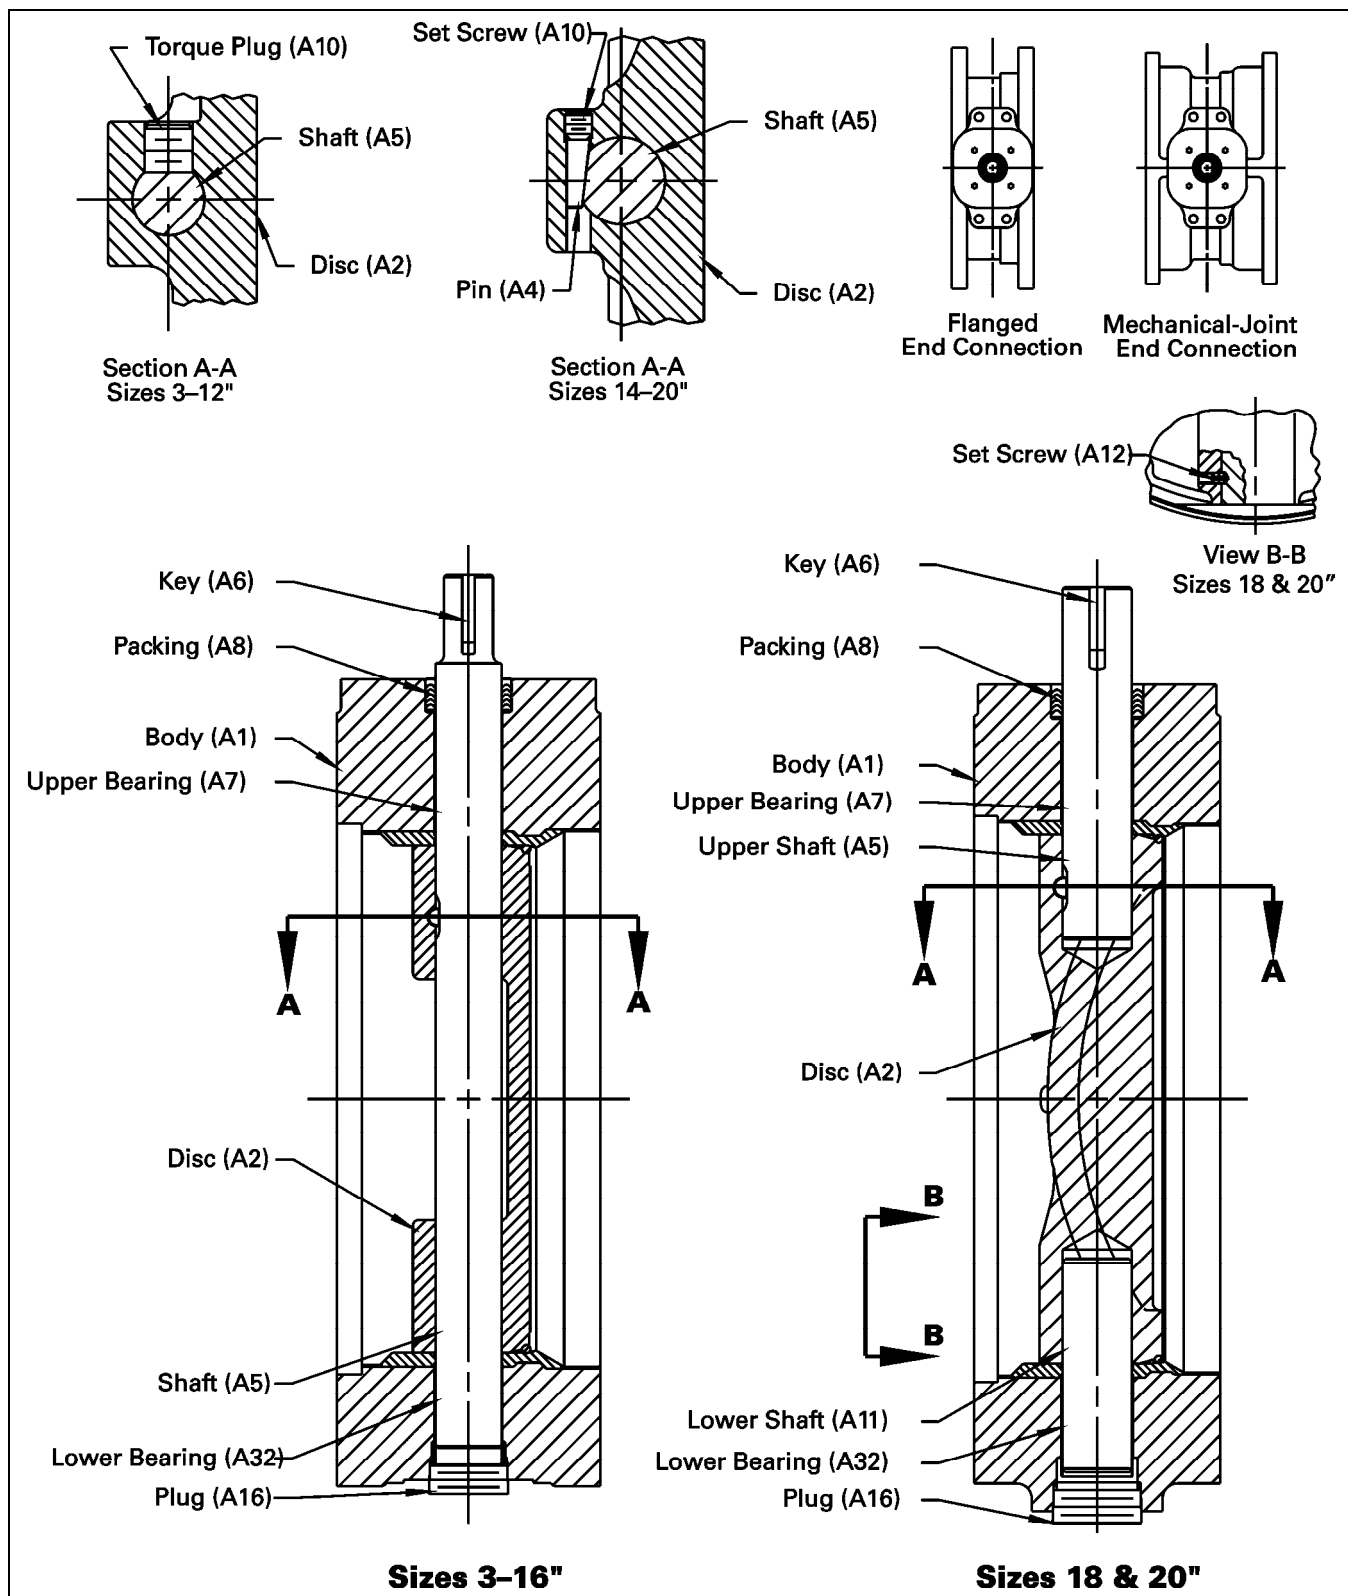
Assembled 3-20" BAW AWWA Butterfly Valve
